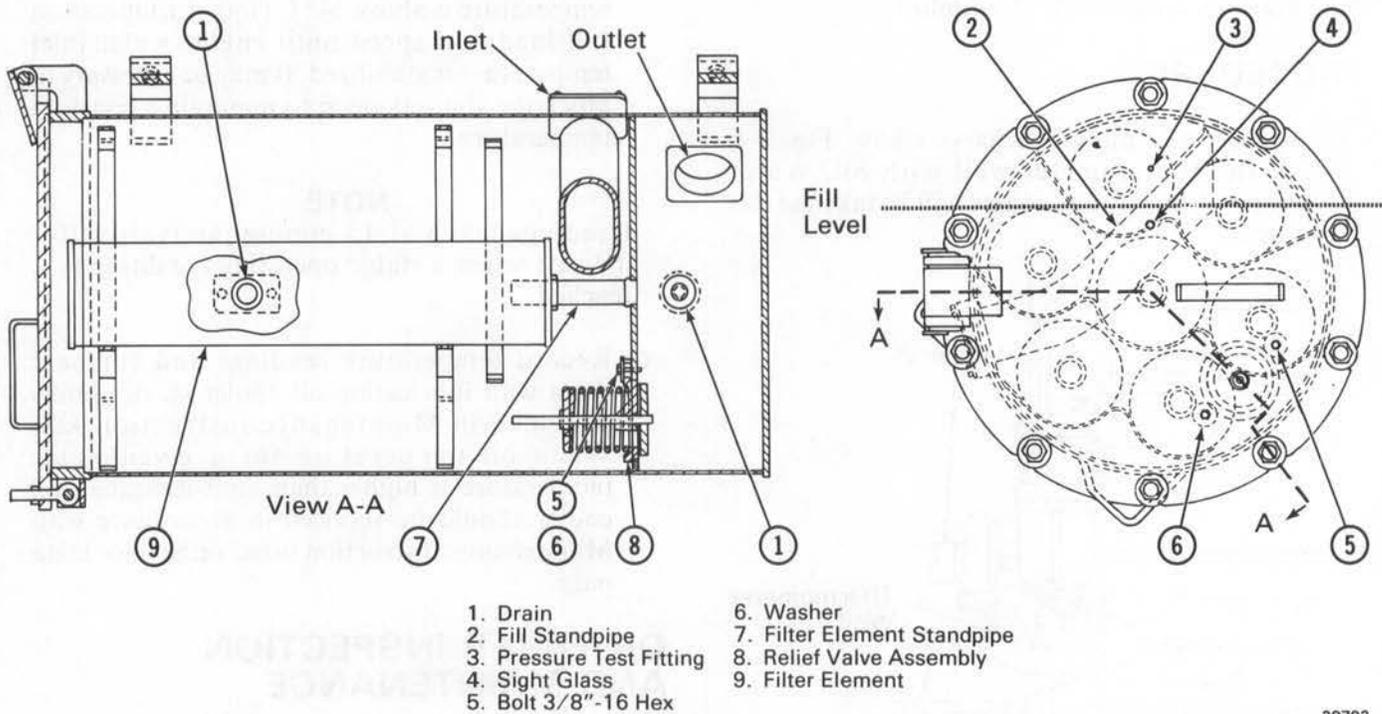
Seven Element Lubricating Oil Filter Assembly
